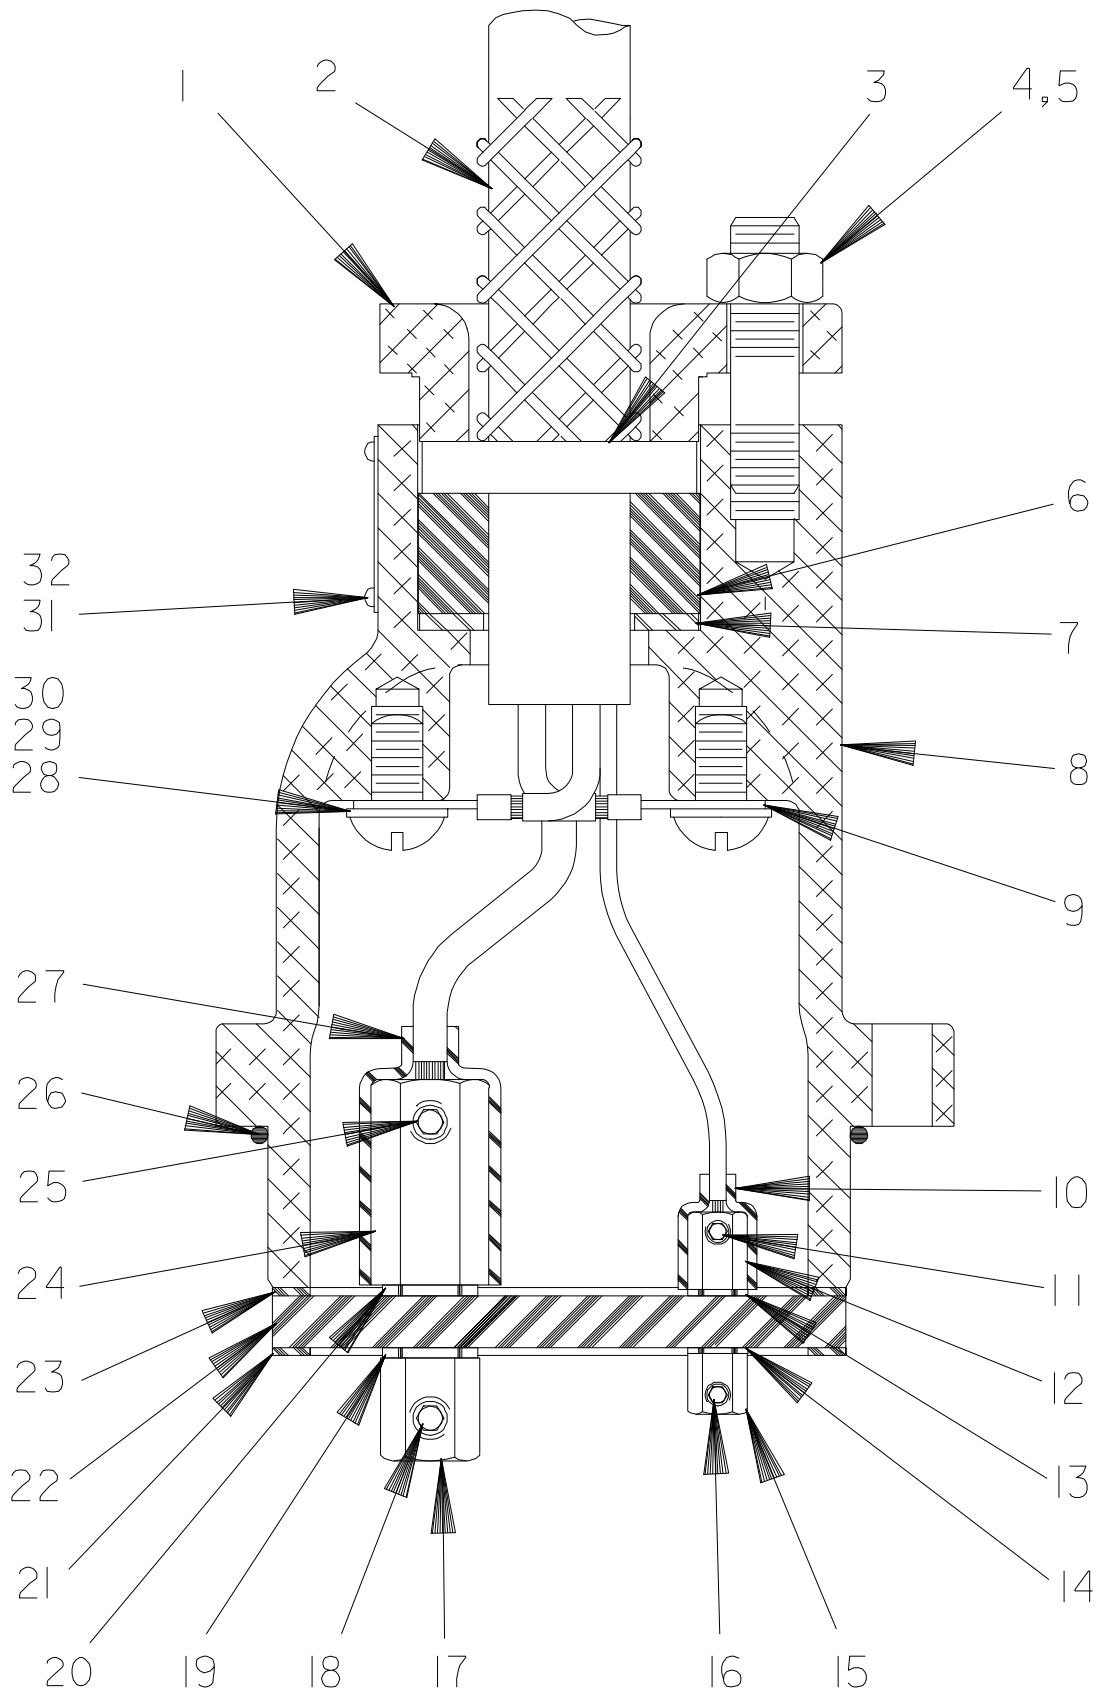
47367-079 Terminal Housing And Cable Assembly
